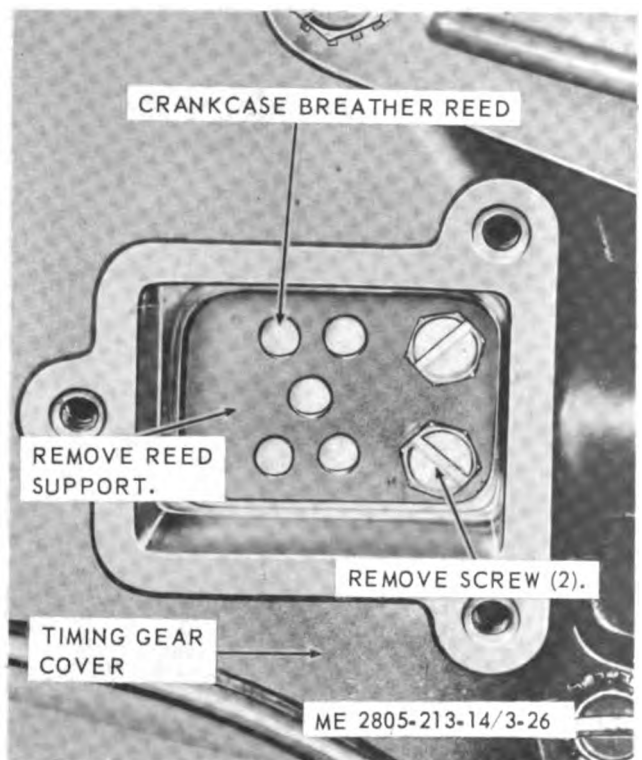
Air breather cover and crankcase breather reeds, removal and installation.
